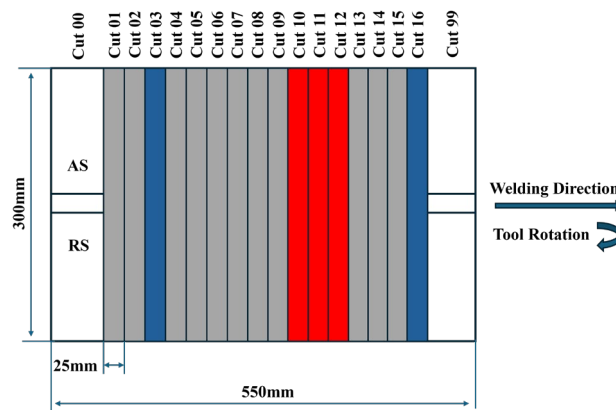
Cutting layout used for specimen extraction, indicating the advancing side (AS), retreating side (RS), welding direction (identical to rolling direction) and the locations of cuts.
